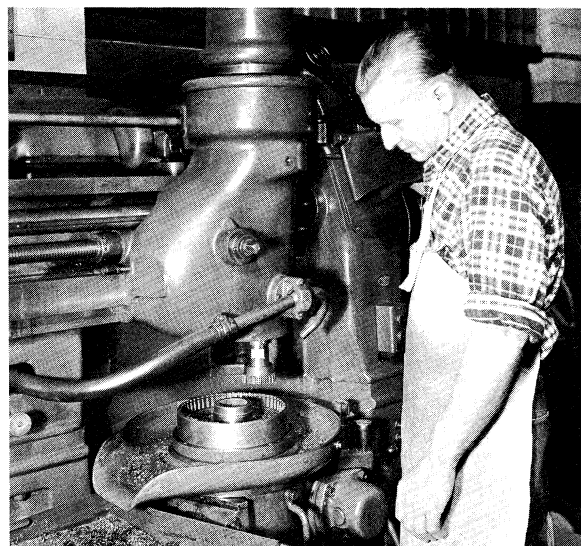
Producing an internal spur gear with a gear shaper. Cutting action is achieved by reciprocating and infeeding the gear-like shaper cutter as the gear blank is rotated in proper timed relationship with the cutter.
